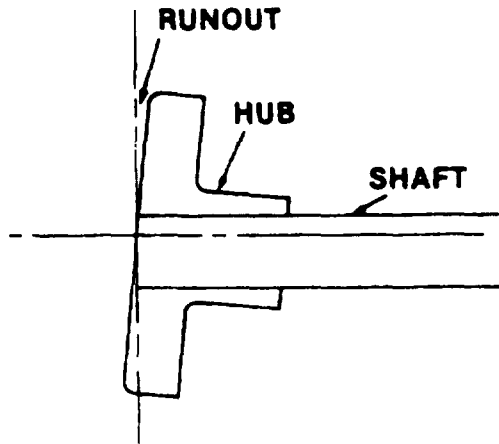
Face Runout of Generator Coupling. (Courtesy Caterpillar, Inc)
